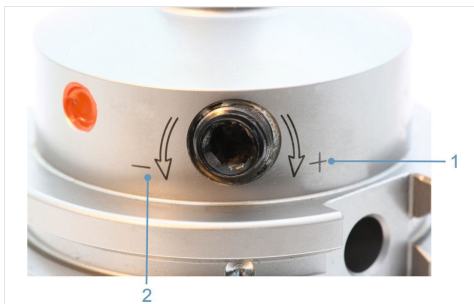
Indication of the direction of rotation for clamping and unclamping the tool
